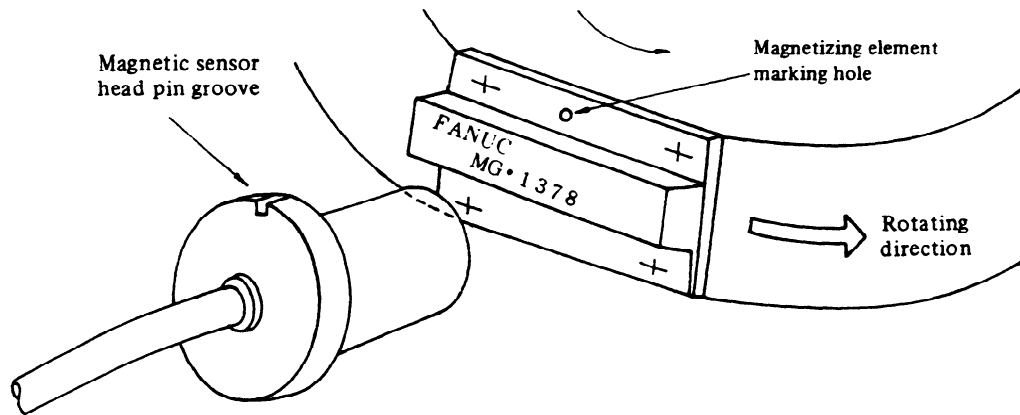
(d) Magnetic sensors mounting example (4) (Q, R, S, T)
